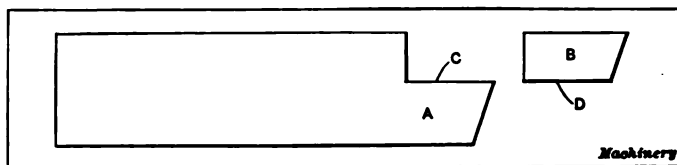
High-speed Steel Cutter to be Welded to Shank of Machine Steel
